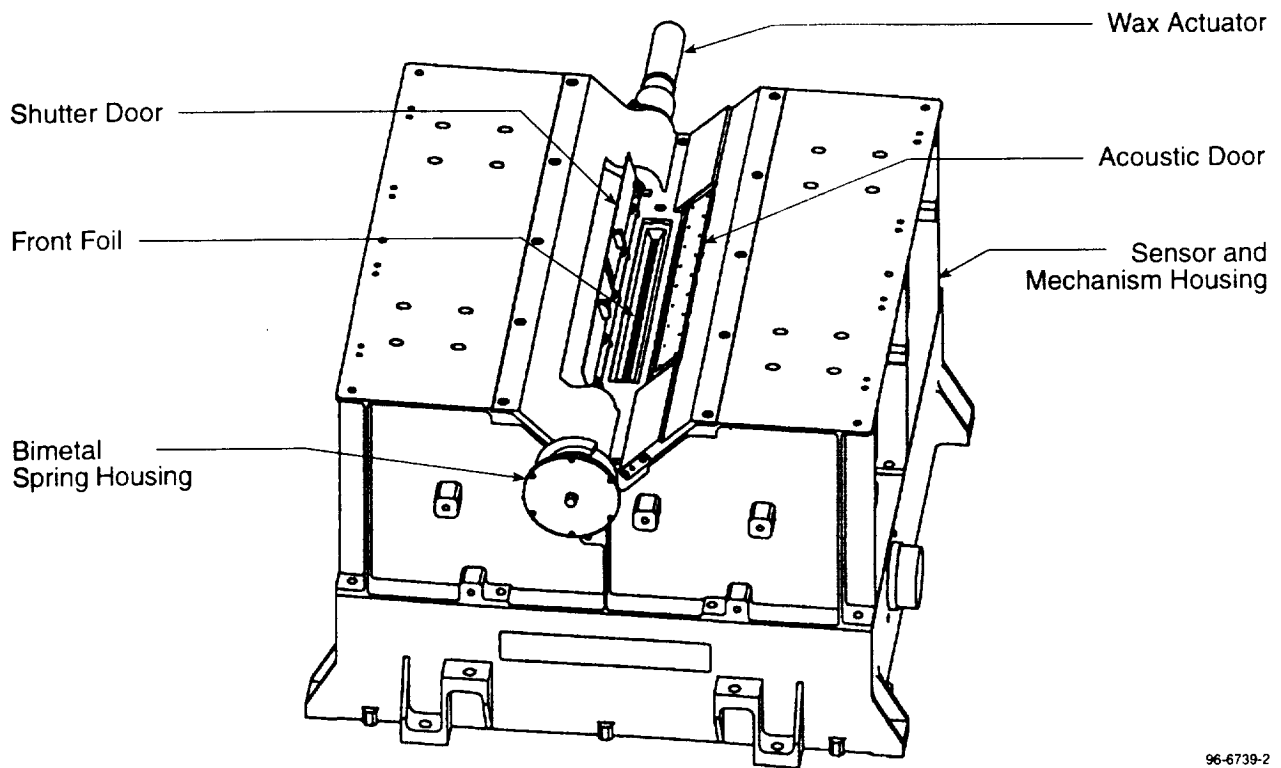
INCA Sensor with Collimator Removed to Show Door Assembly
